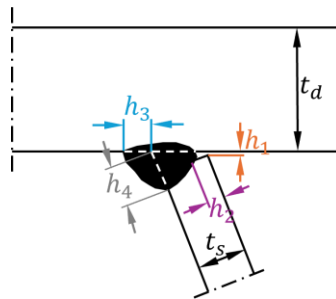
Dimensional parameters of the single-sided partial penetration welded connection
